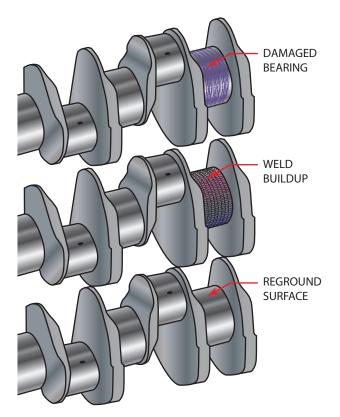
Bearing surfaces are built up on this crankshaft.
